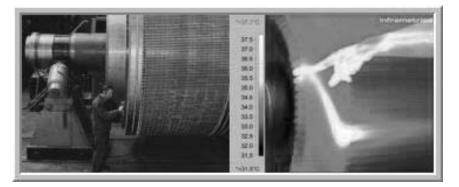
Cracked or broken rotor bars short and produce heat
